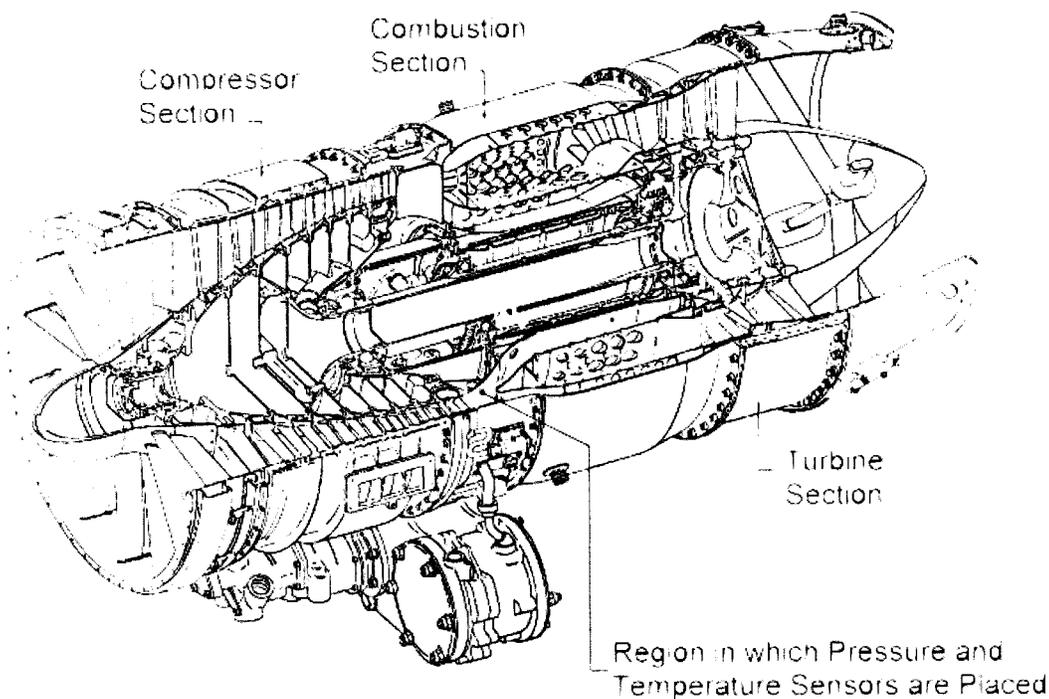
Cutaway view of the General Electric, Inc., CJ-610 turbojet engine, showing its principal parts and the point from which air is drawn for the calorimetric estimation of condensed water content in clouds.
